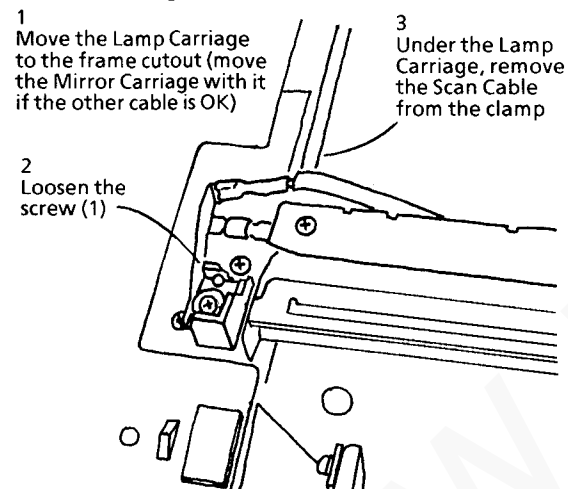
Disengaging the Rear Scan Cable from the Lamp Carriage
